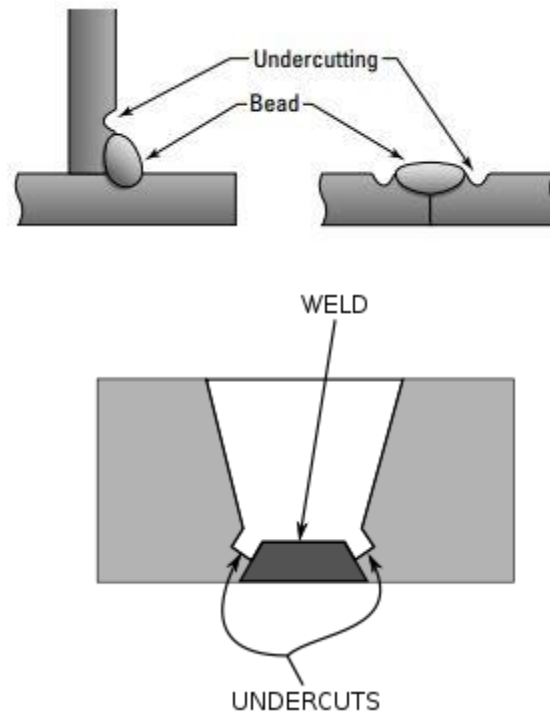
Section Portion of Undercutting on the Welded Bead (Davies, 1993)
